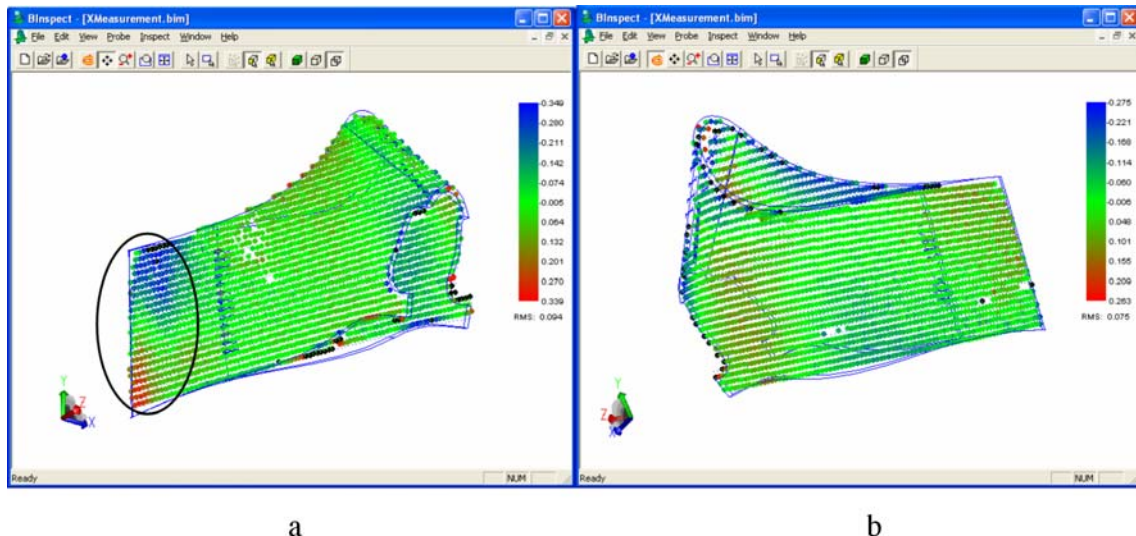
Formed part inspection. a Registered front view. b Registered back view
